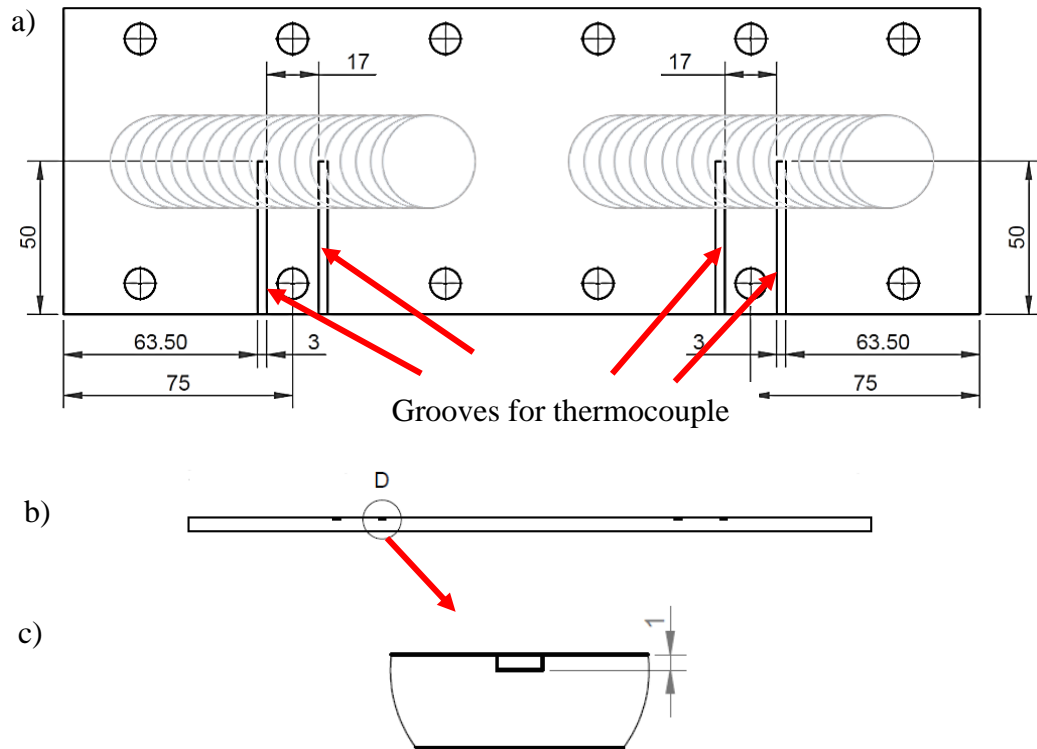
18 Plan view and dimension of thermocouple groove in Al plate; (b) Cross section of the plate; (c) Higher magnification details circled and labelled as D in Fig. 3 - 11b showing the groove depths.
